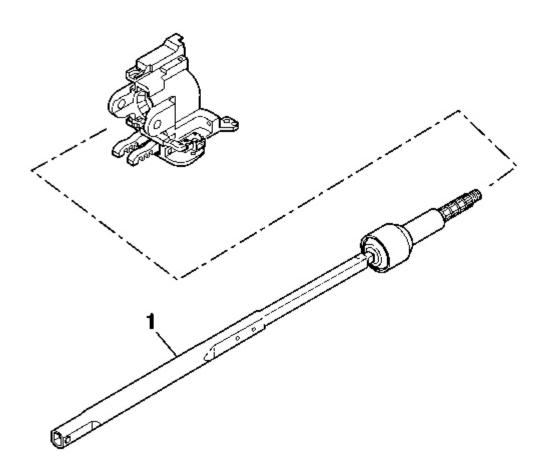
Identifying Steering Shaft Courtesy of GENERAL MOTORS CORP.
